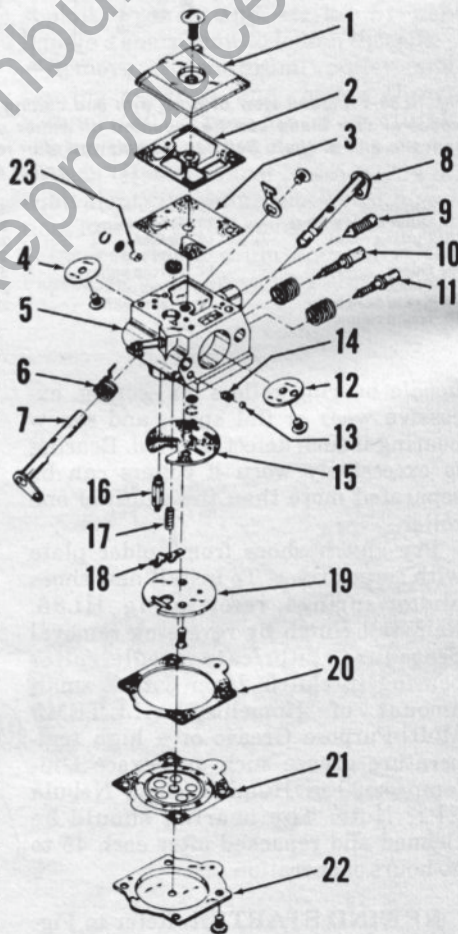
Exploded view of Walbro model HDC carburetor.
